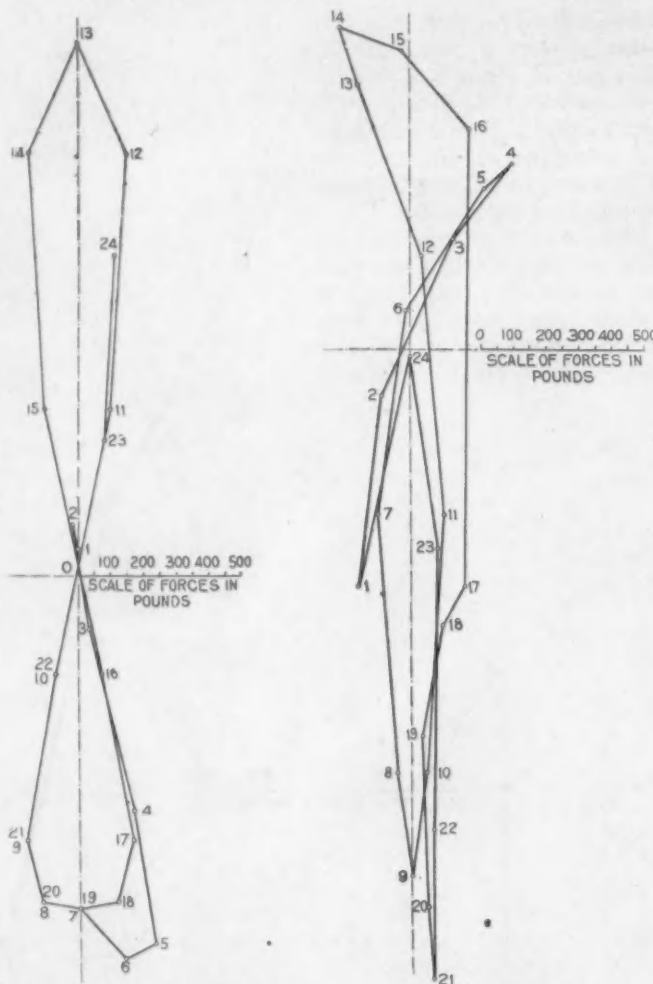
LOADS ON MAIN BEARINGS I AND VII. FIG. 11, ON II, III, V AND VI OF A CRANKSHAFT WITH BALANCE WEIGHTS
